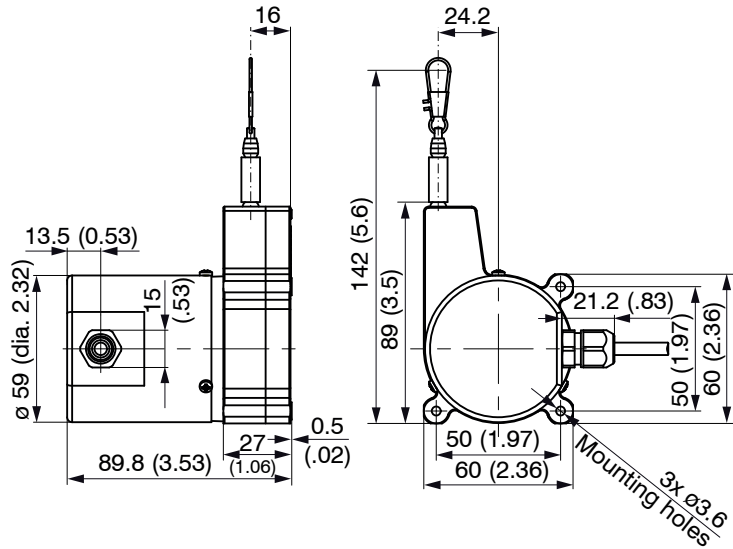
Dimensional drawing WPS- ... -MK60-CR, with potentiometer, dimensions in mm, not to scale
